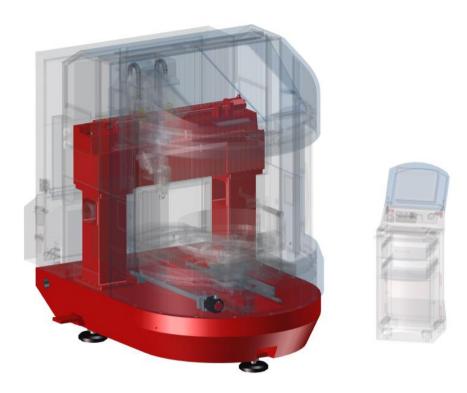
Polymer Granite Base & Welded Steel Frame ``
